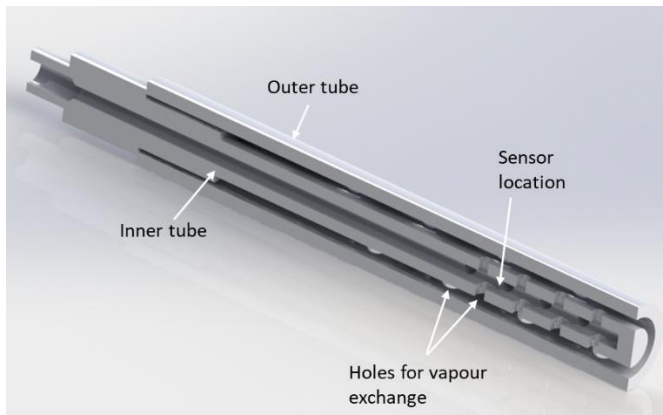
Sensor system design for this work – illustrating the perforated peek outer tube and smaller inner tube design used.
